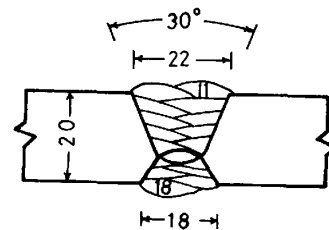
Welding conditions of FISCO cracking test.
